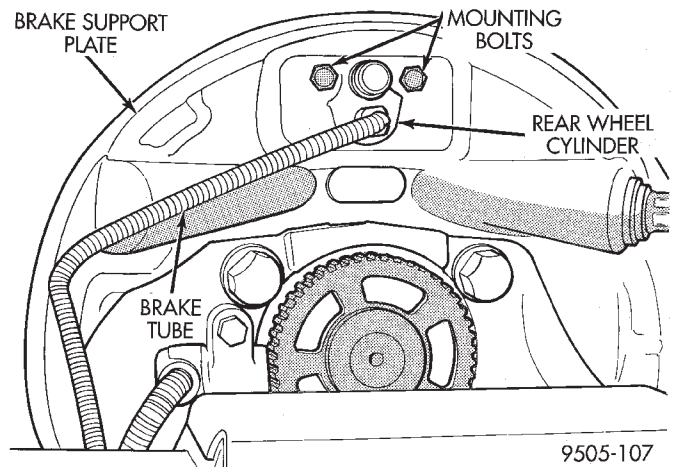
Brake Hydraulic Tube At Wheel Cylinder
